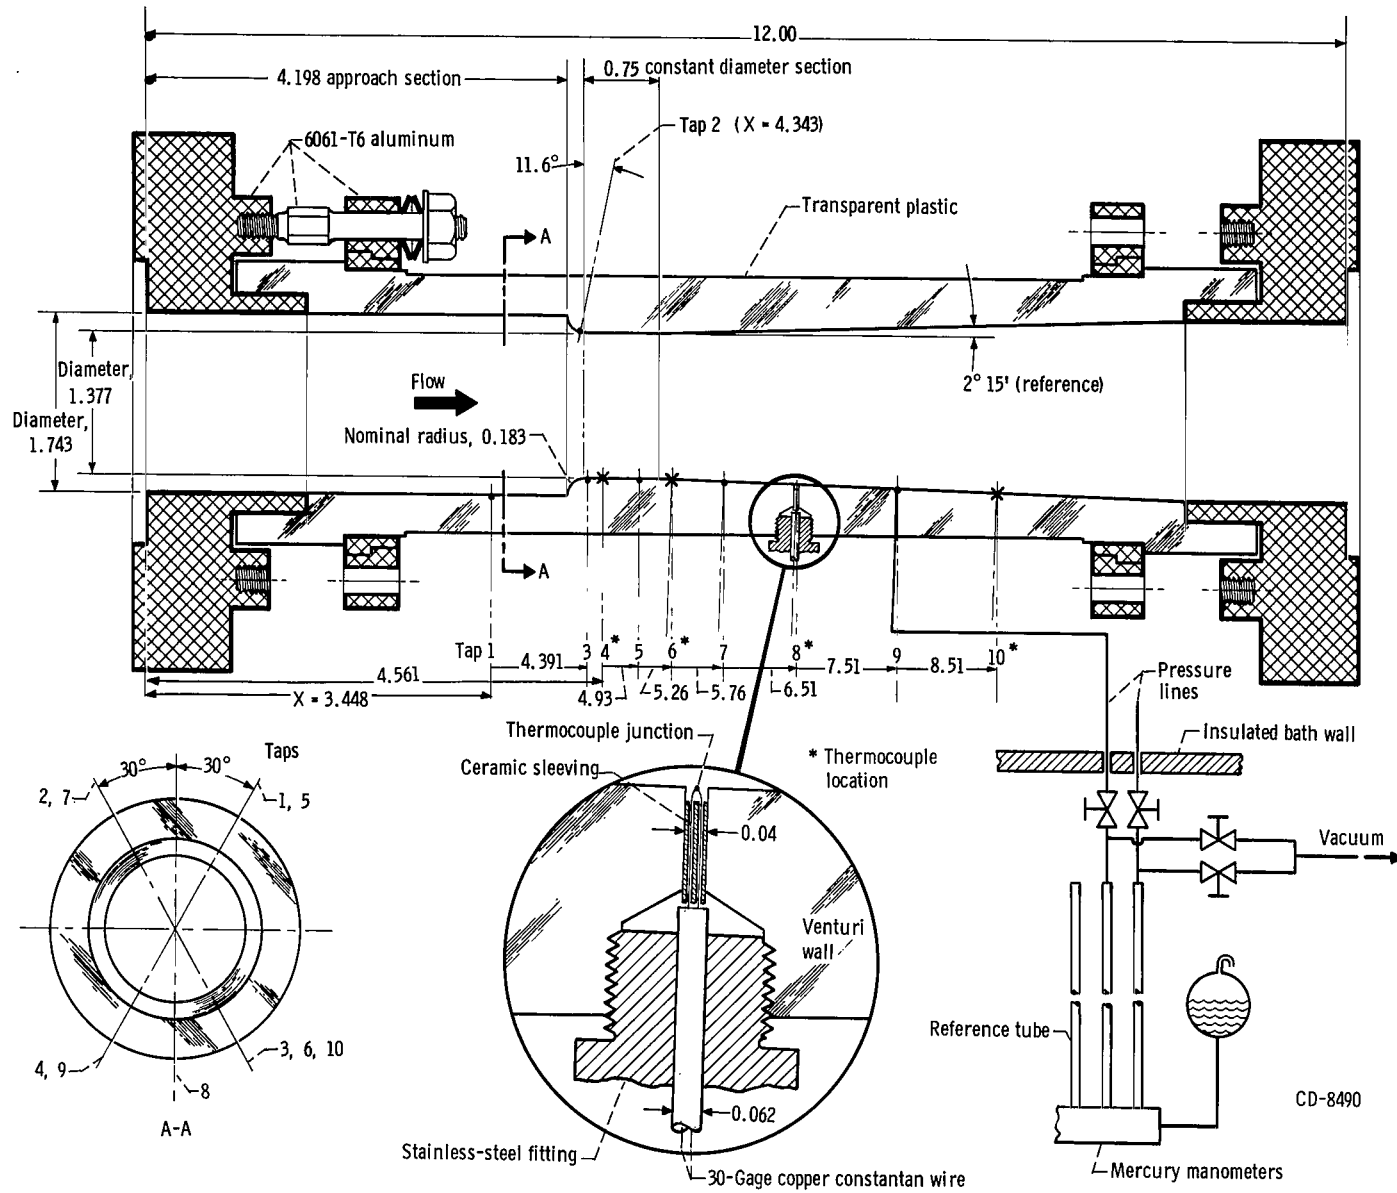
Schematic drawing of venturi test section. (All dimensions are in inches.)
